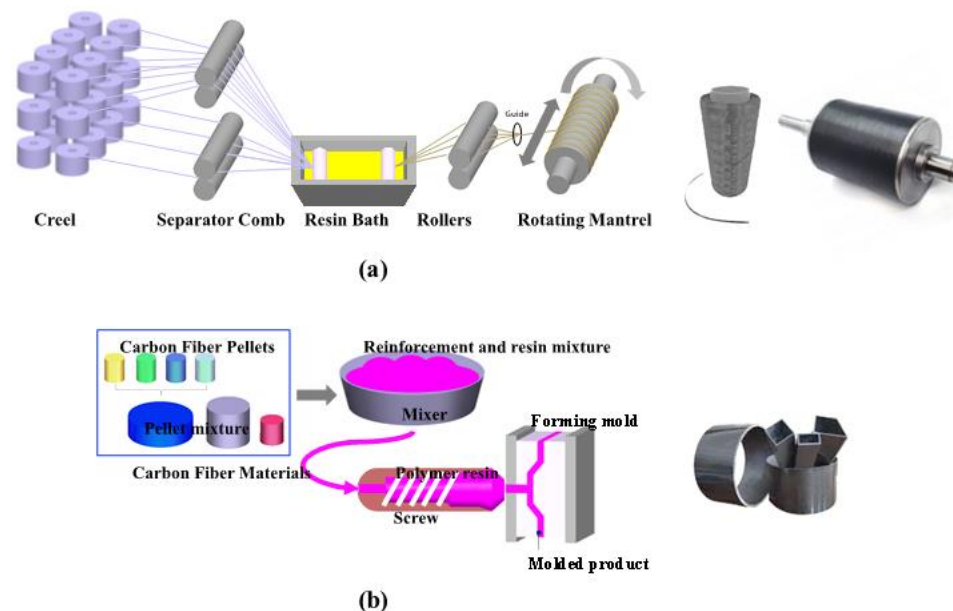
Carbon fiber molding manufacturing process and finished product, (a) Filament-winding Molding (b) Injection Molding.
